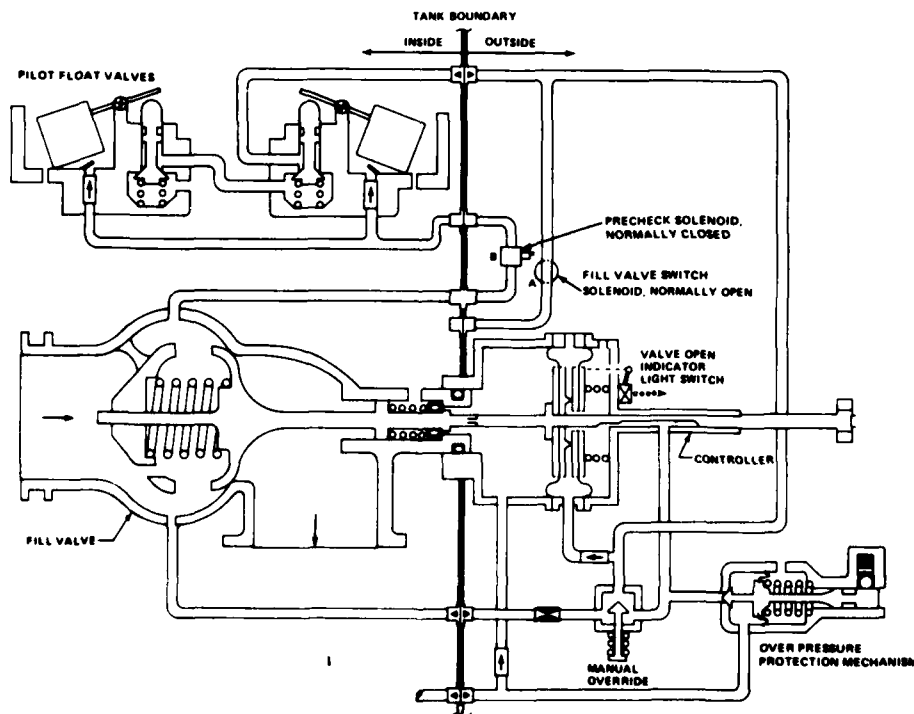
REFUELING VALVE ASSEMBLY
